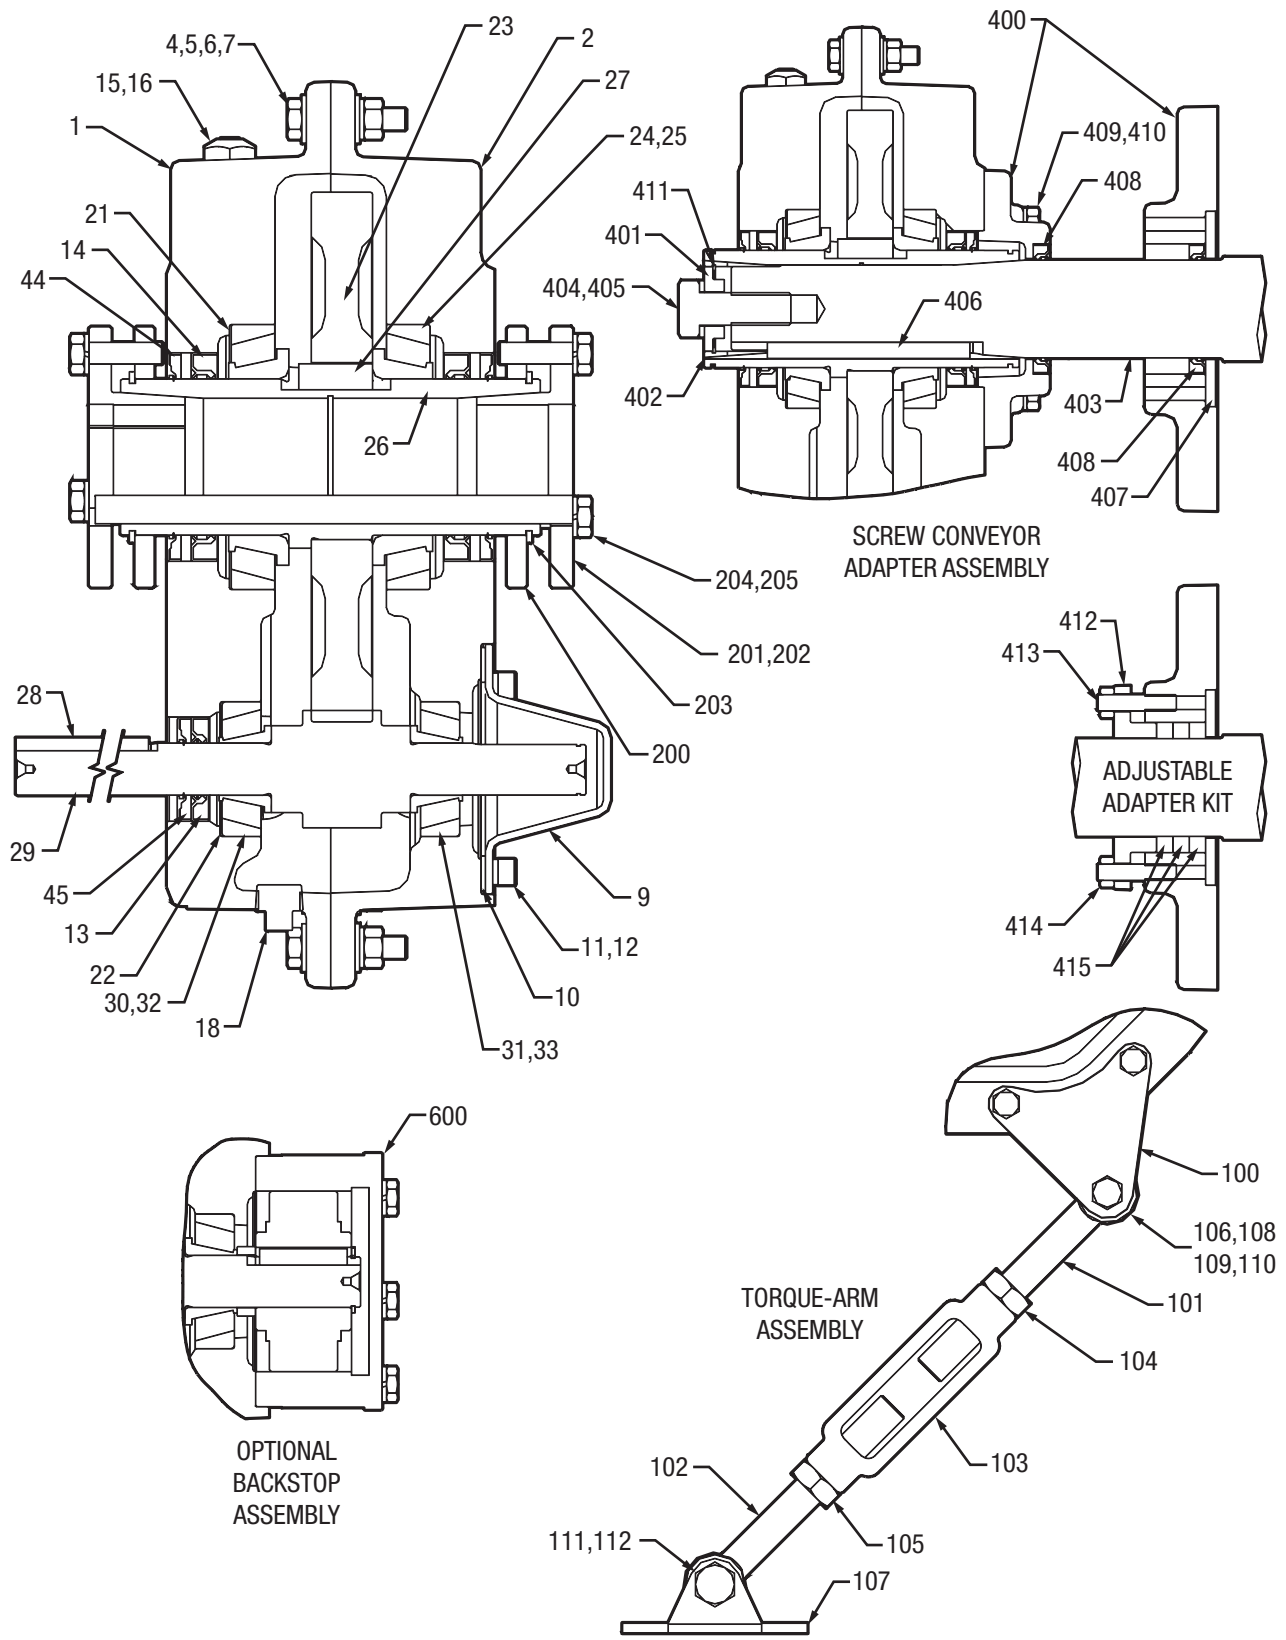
Parts for TA0107L thru TA7315H Taper Bushed Single Reduction Reducers
